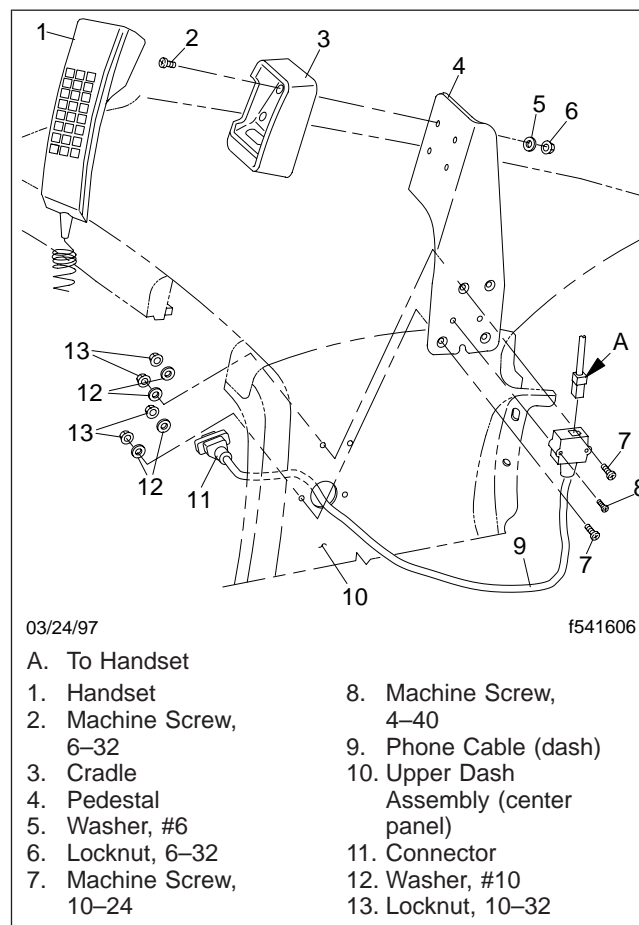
, Handset, Cradle, and Pedestal (exploded view)
